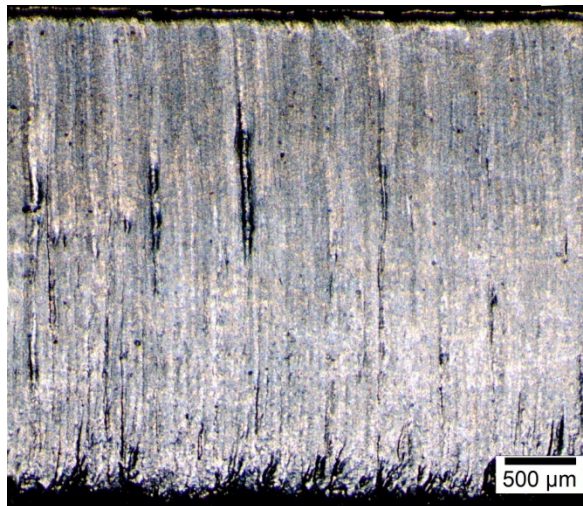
View of K303 powder steel cut edge - 3,0 mm thick. CO₂ laser, working gas: N₂, working gas pressure: $p=8$ bar, power: $P=3600$ W, cutting speed $v=3,3$ m/min
